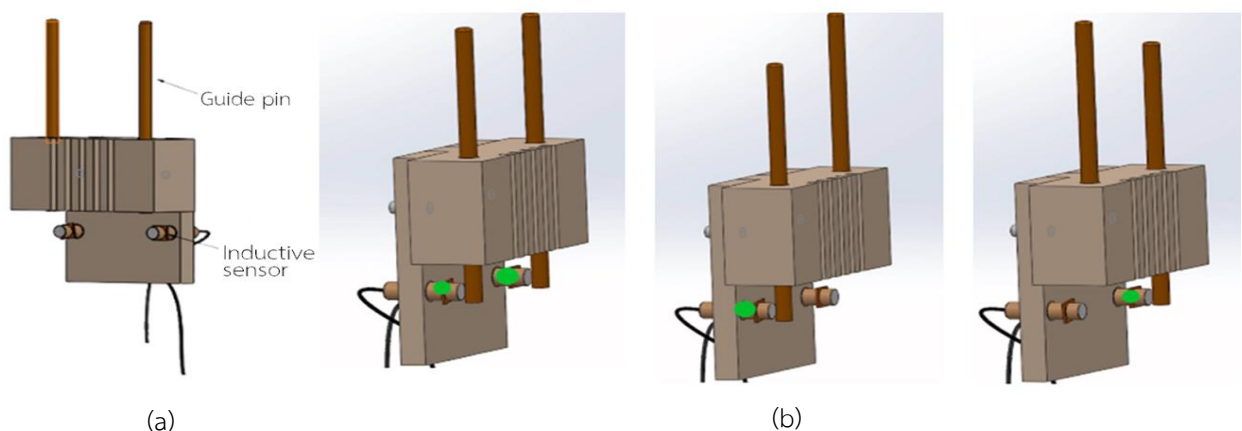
Poka-Yoke (a) Inductive sensor and guide pin. (b) Workpiece Inspection.
